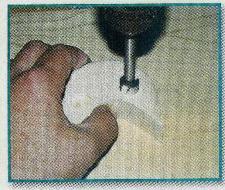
Using the previously drilled 1/16"-Dia. holes as centers, bore the holes which will receive the eyes.
